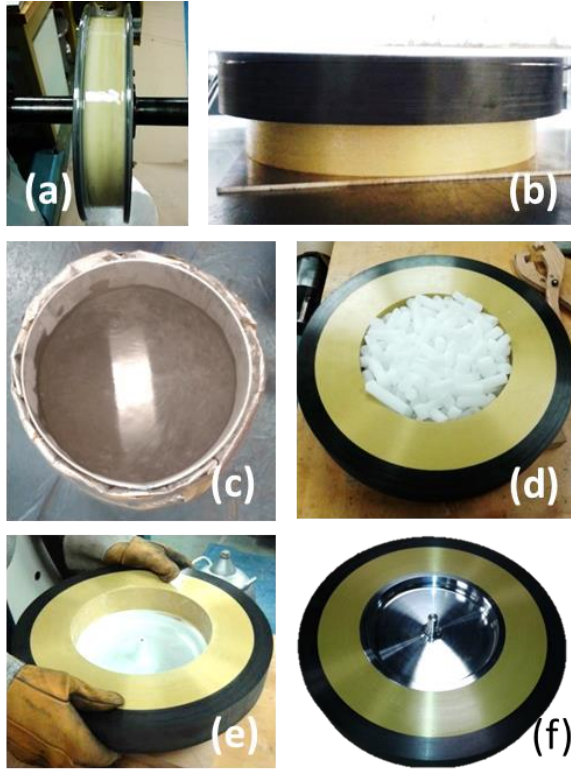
Rotor assembly: (a) filament winding; (b) FRPC press fitting; thermal fit of hub and assembled rings showing (c) liquid nitrogen bath, (d) dry ice and (e) manual hub insertion; (f) final rotor.
